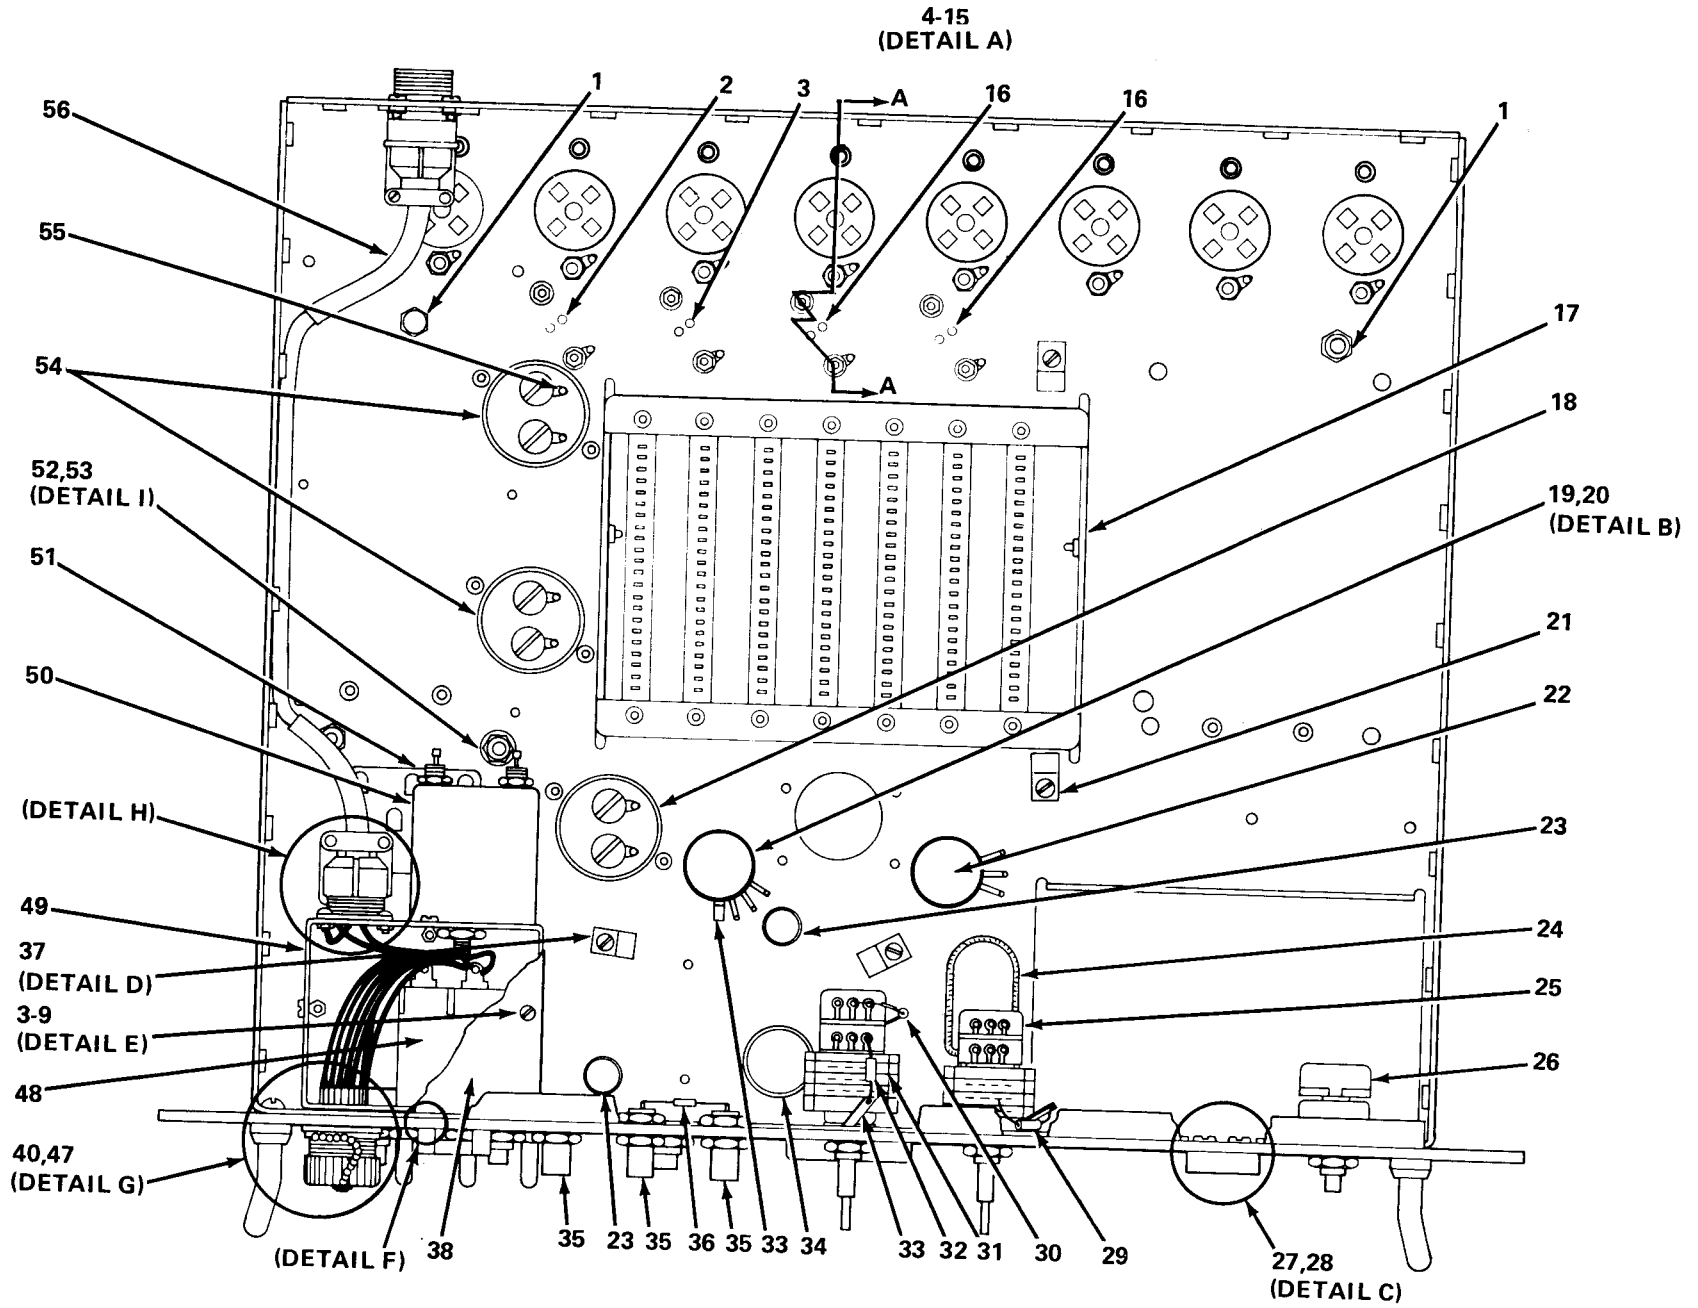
Main Chassis Subassembly (Sheet 1 of 3)
